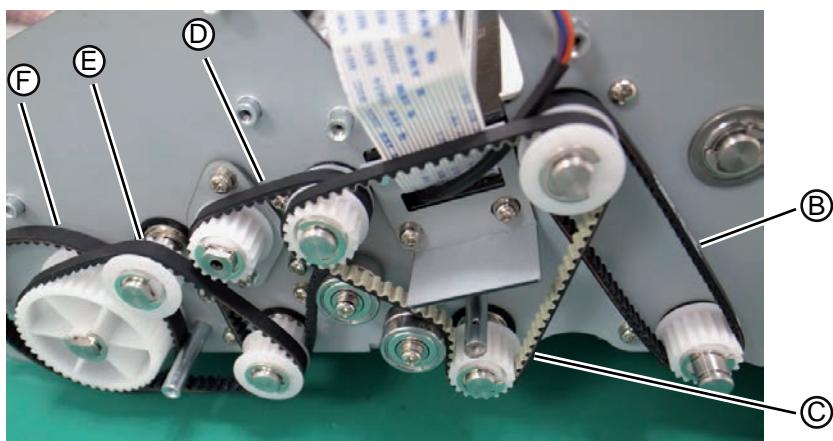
Toothed Belts - Order (device serial number T0100016 - T0100815, T1100816 - T1102060, T1102080 - T1102726)
